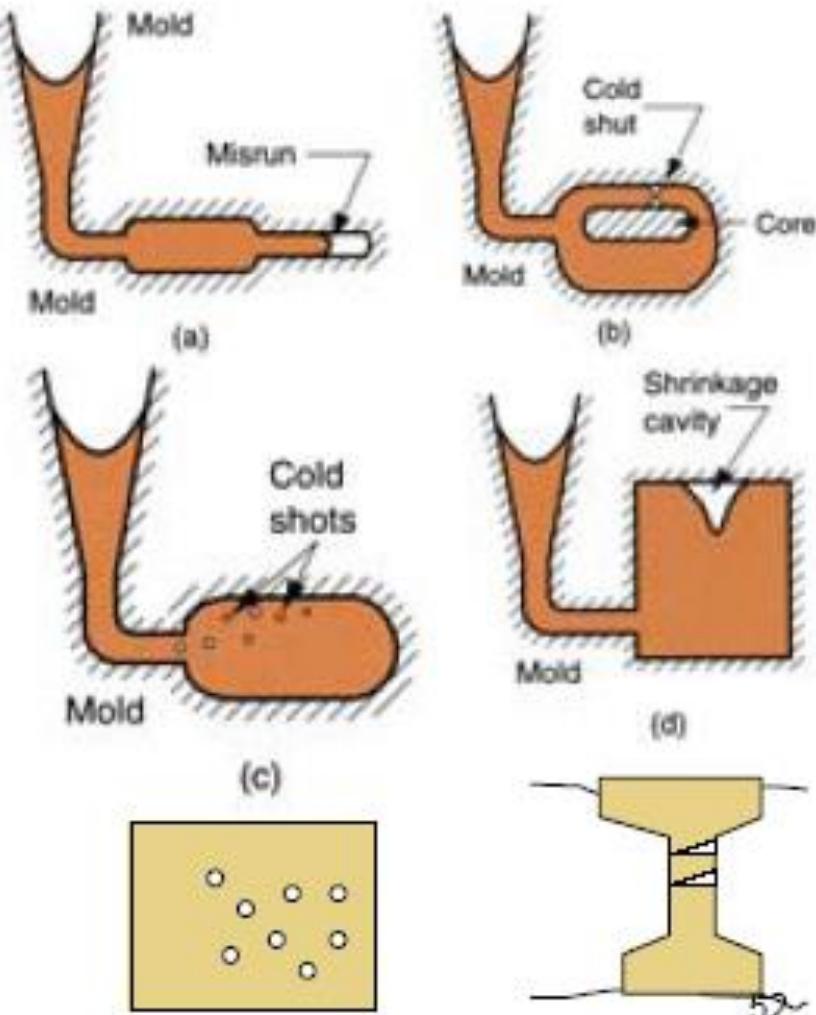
Some common defects in castings: (d) shrinkage cavity
